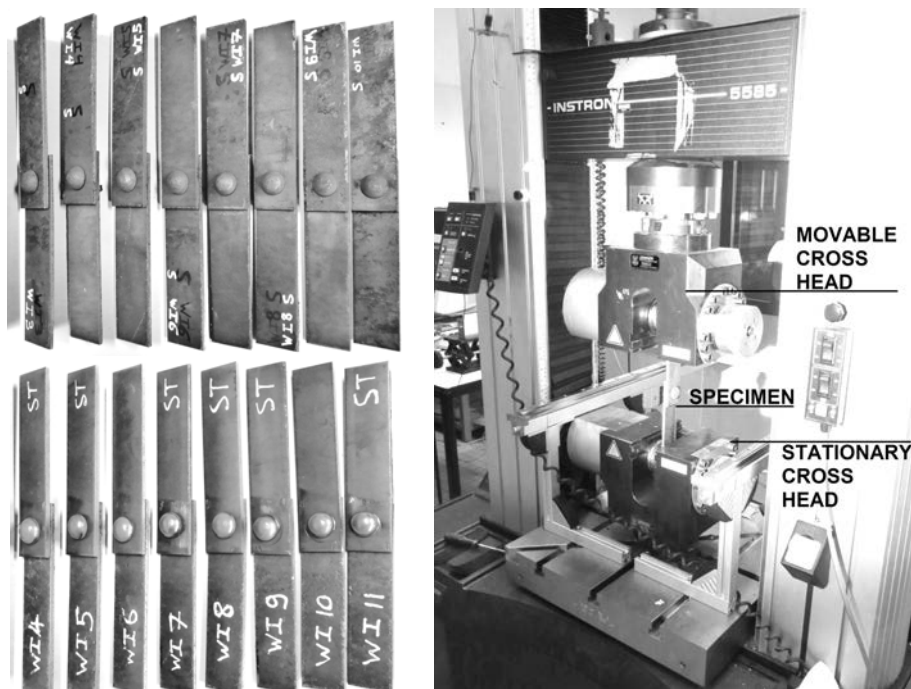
Joints type O (top-left) and joints type R (bottom-left), and set-up into the Instron® 5585 testing machine (right)
